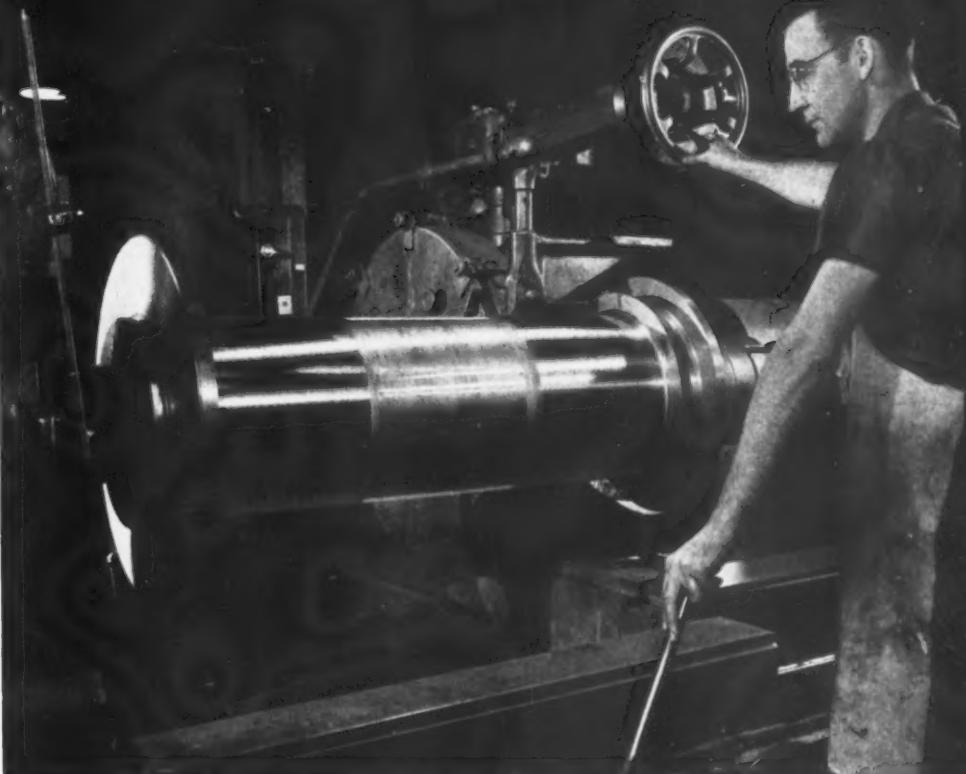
Landis Cylindrical Grinding Machine being Used for Finish-grinding Two Surfaces on the Quill for an Electric Locomotive to Receive Roller Bearings
